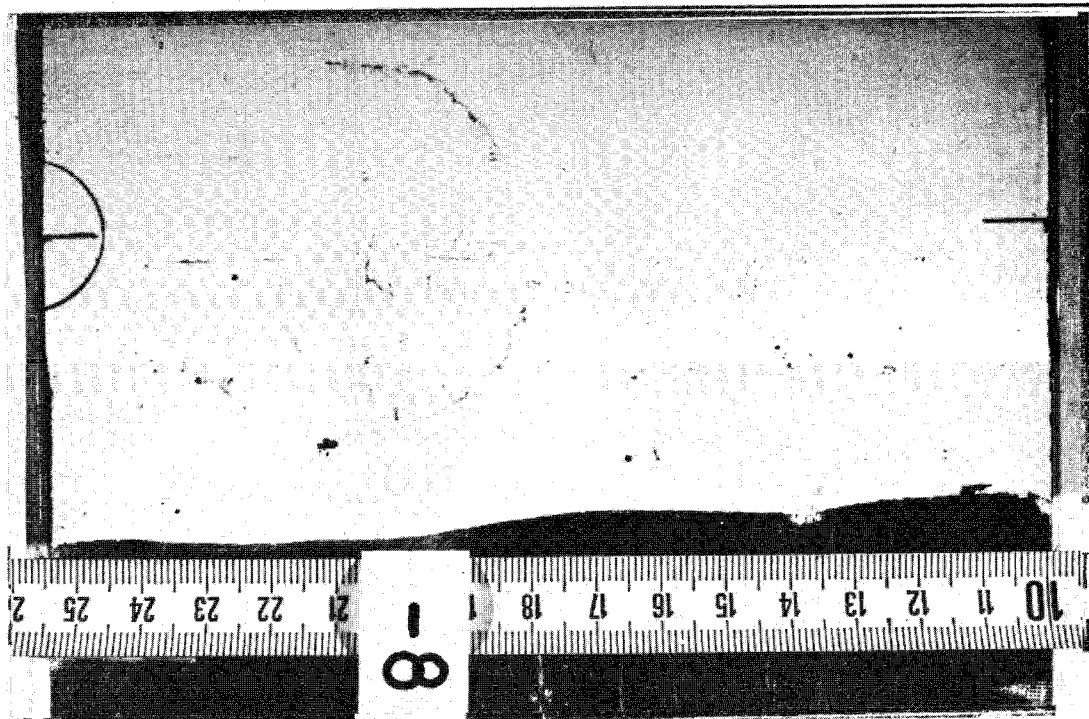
Specimen No. 8 : crack offset : - 5 mm
